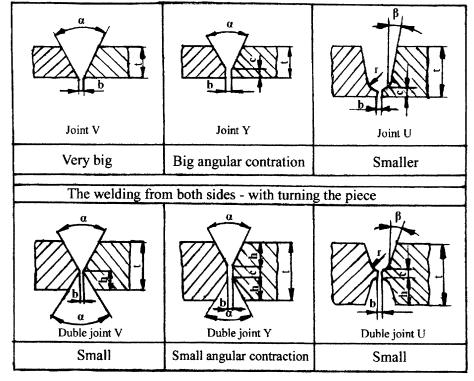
Different groove's shapes used at head to head welding of tin thickness.
